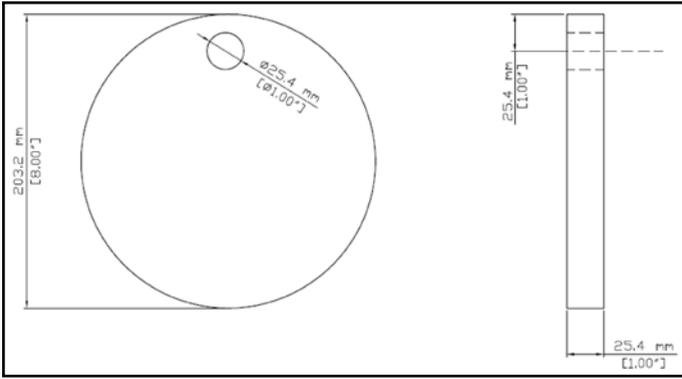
Drawing showing dimensions of the round plate that is carburized, hardened, and lightly ground and then laser heat treated.
